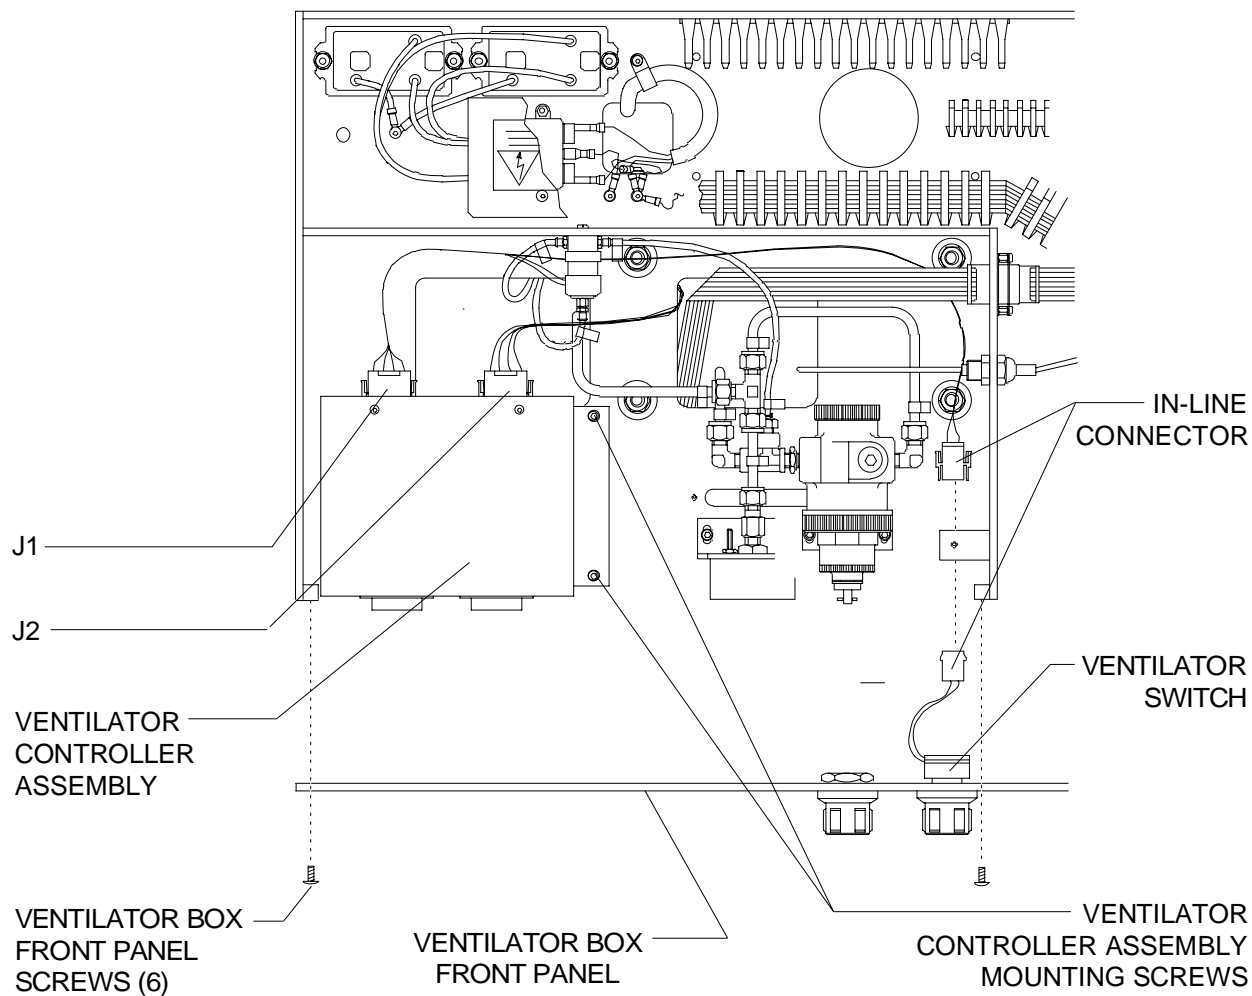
VENTILATOR CONTROLLER ASSEMBLY
